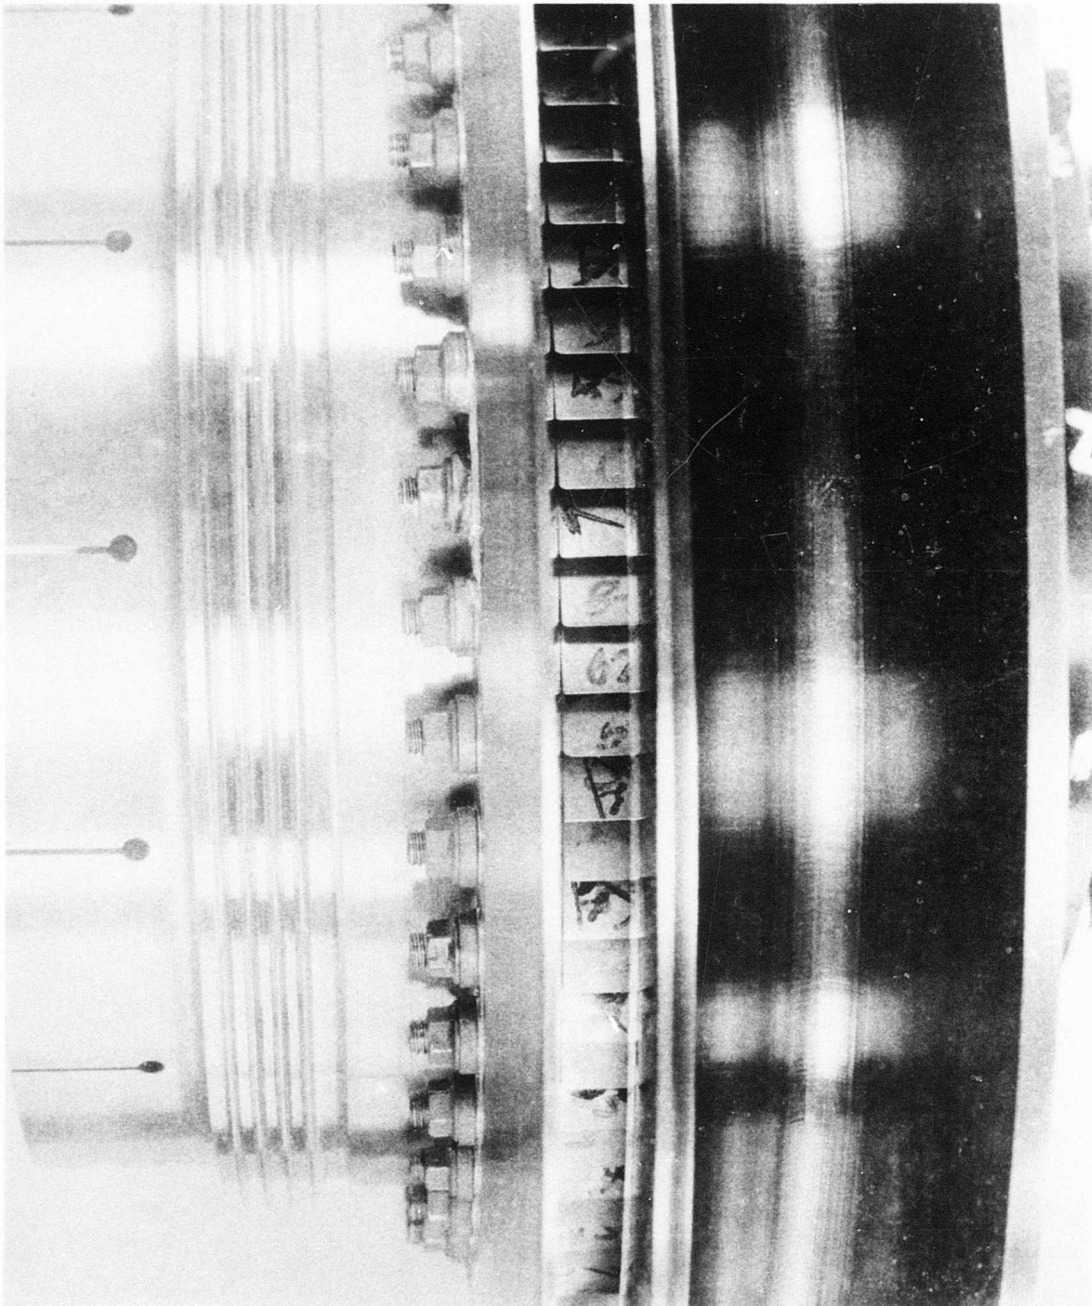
Close-up of Phase III Rotor Illustrating Clearance Between Rotor Blade Trailing Edges and the Rotating Shroud.
